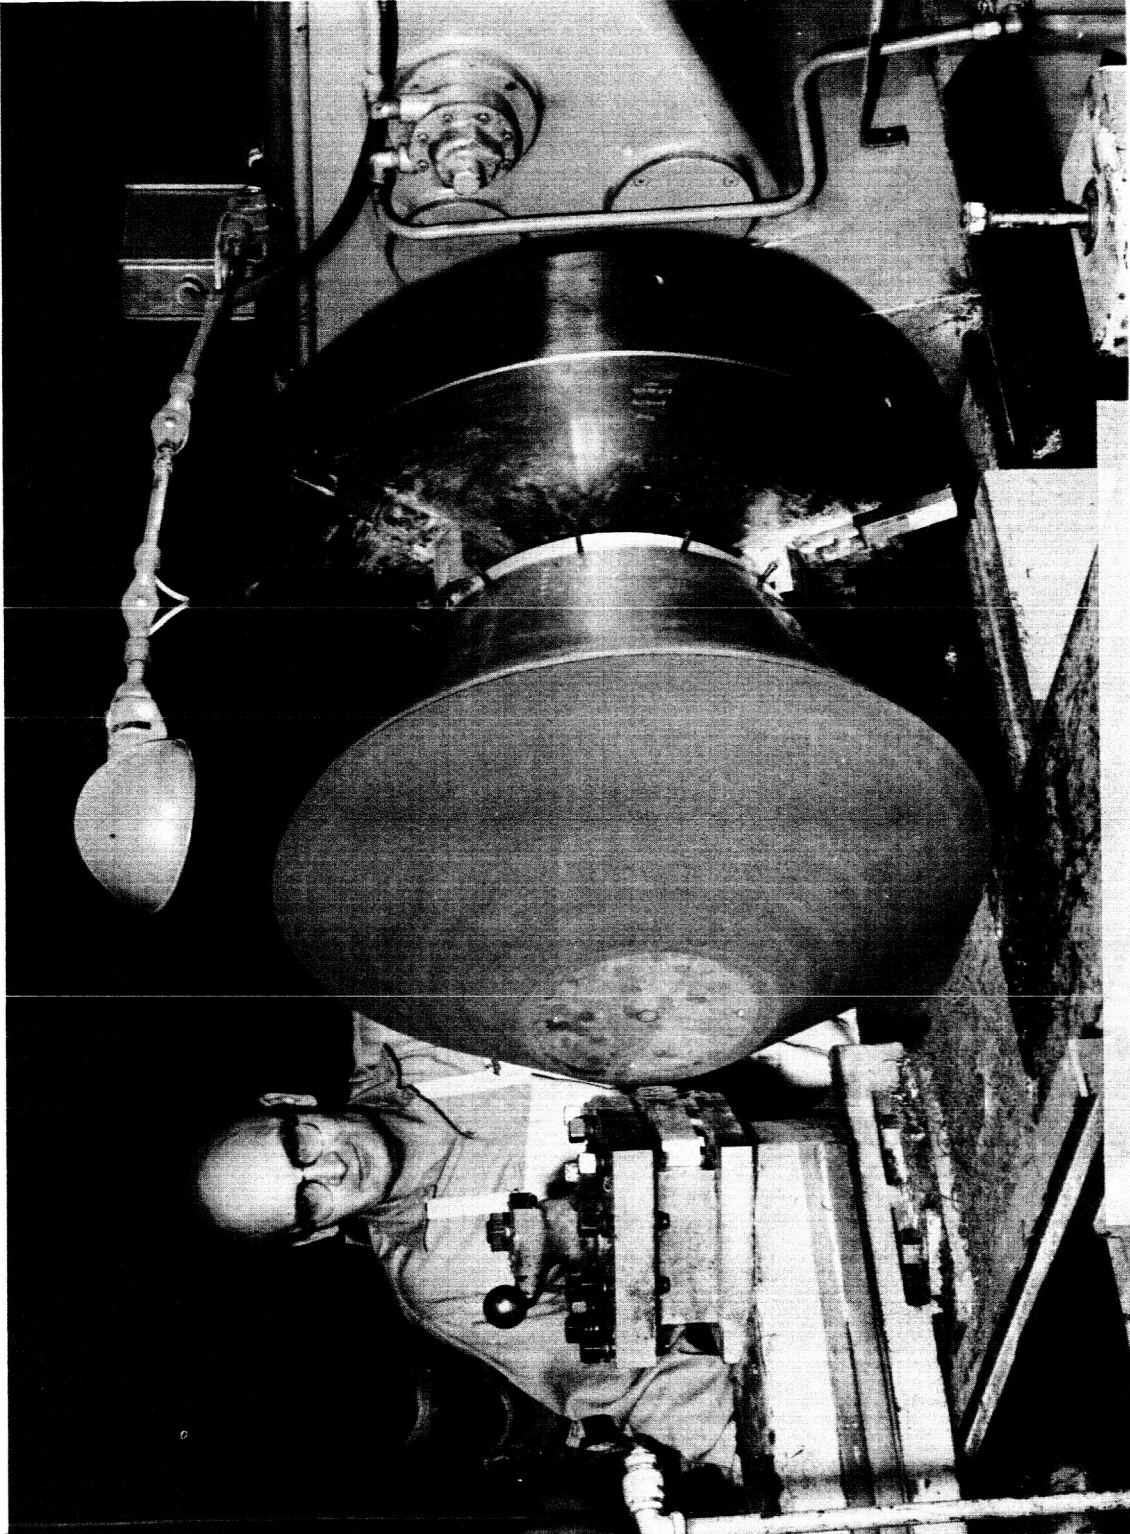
MACHINING OF MARS PROBE MODEL SILICONE HEAT SHIELD
